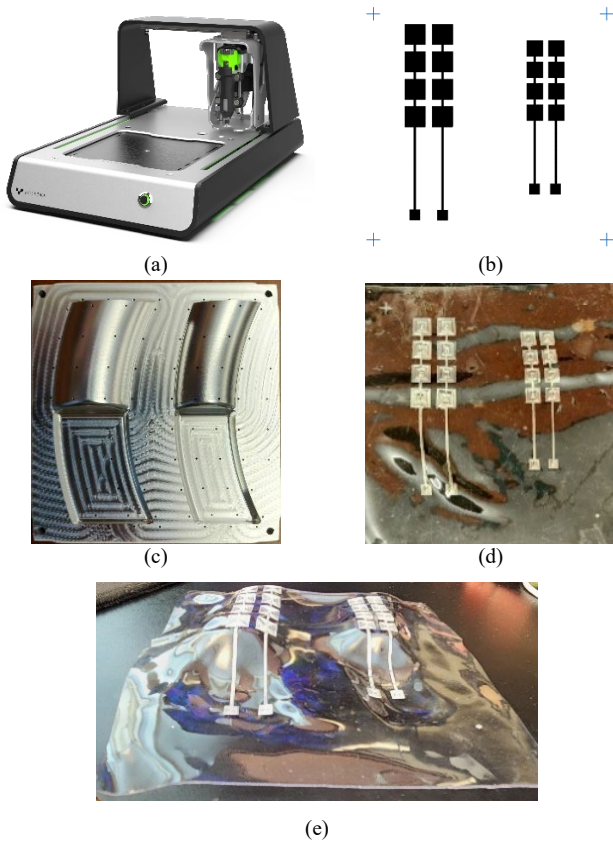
(a) Voltera direct write printer with its (b) electrode design, (c) forming mold (d, e) formed sample
